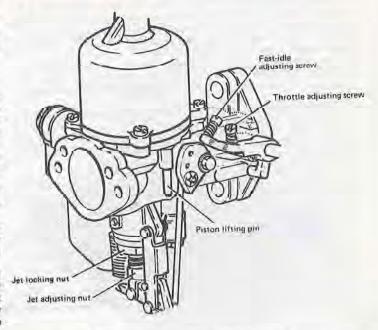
Type H carburettor tuning points (Sec 9)
